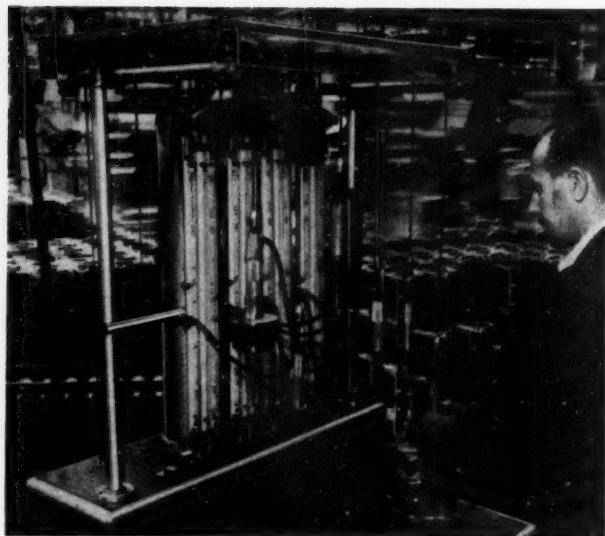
Inspection of the More Important Bores of the Gearbox Casting is Carried Out by the Operator of the Fine-boring Machine with this Solex Equipment
